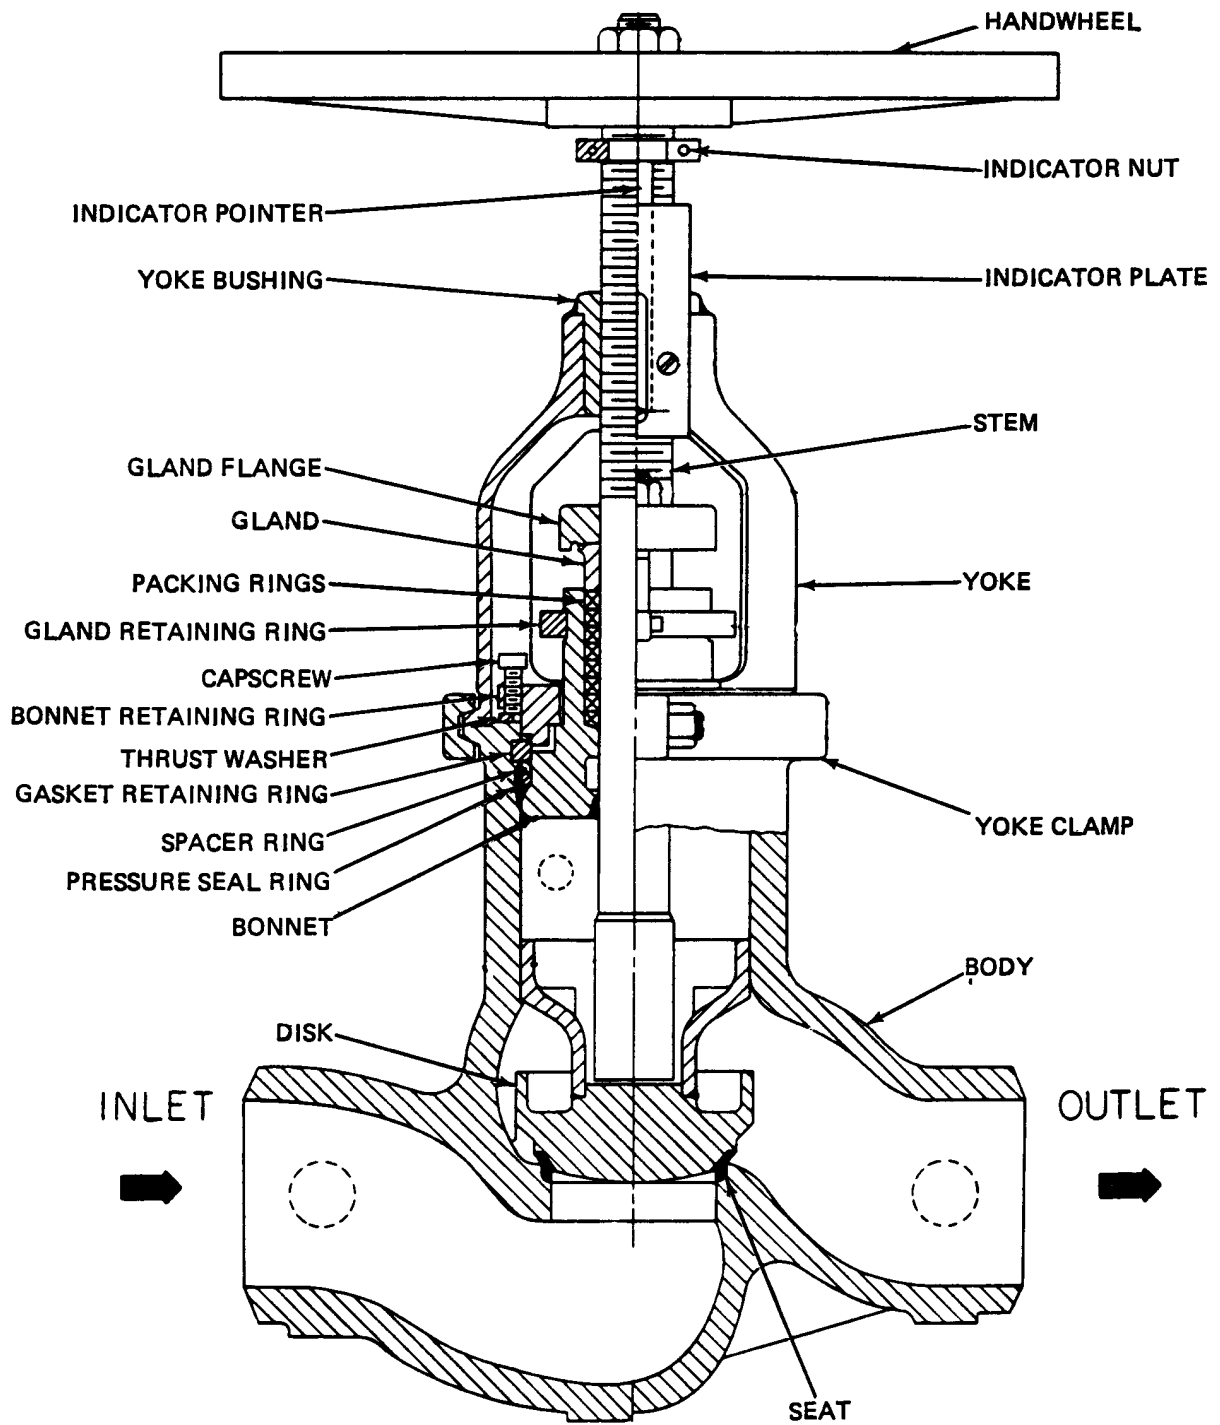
Pressure-Seal Stop Check Valve (Anchor) (Typical)
